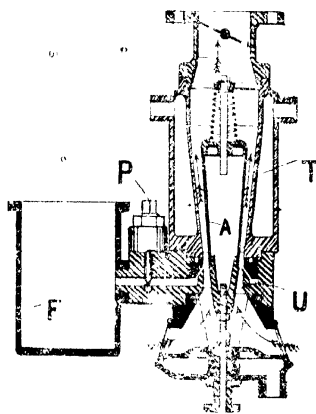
Automatic carburettor with pulsator plug in venturi choke tube and annular petrol jet—Deauville
